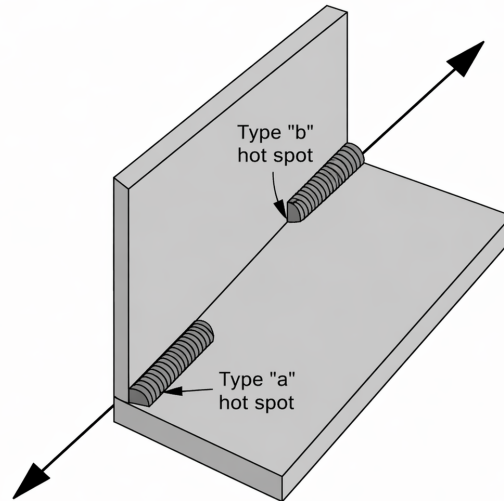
Type "a" and type "b" hot spot weld configurations used for fatigue evaluation in the hot spot method [20].
